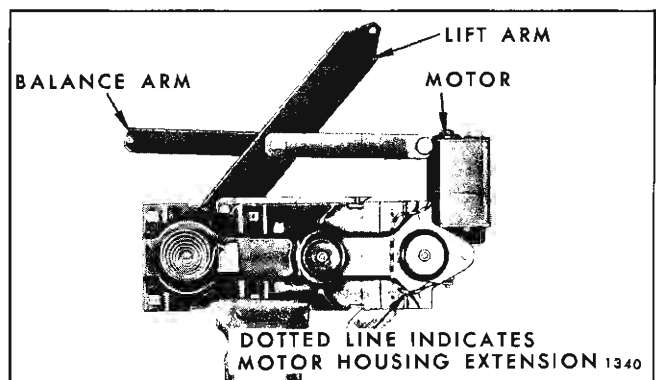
D31—Door Window Regulator and Electric Motor Assembly
